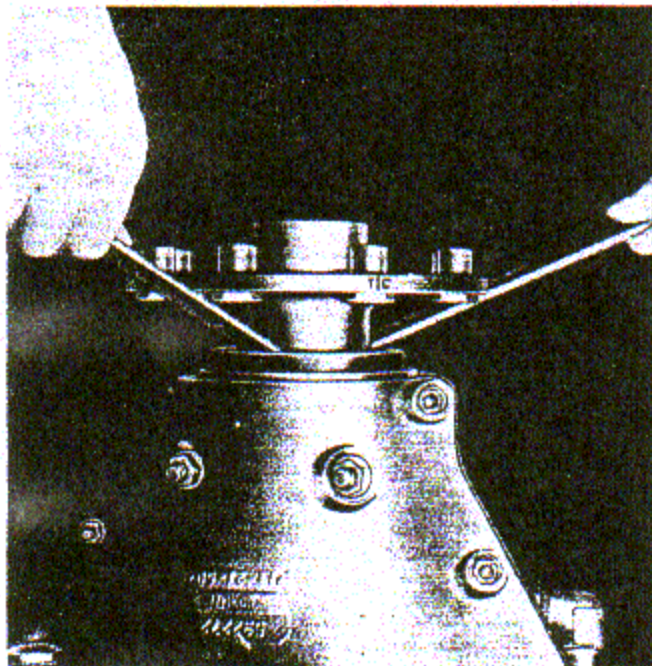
Pressing in Flanged Crankshaft Oil Seal
